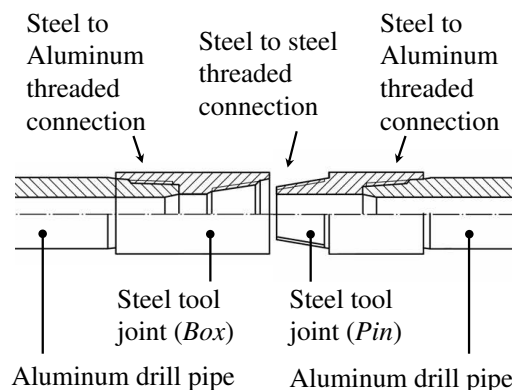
Connection between aluminum drill pipe and steel tool joint.
